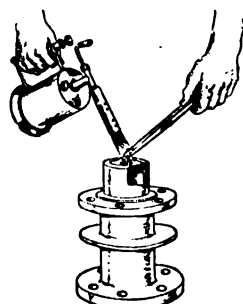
When loose, the plug in the end of the clutch hub should be sweated back in place
